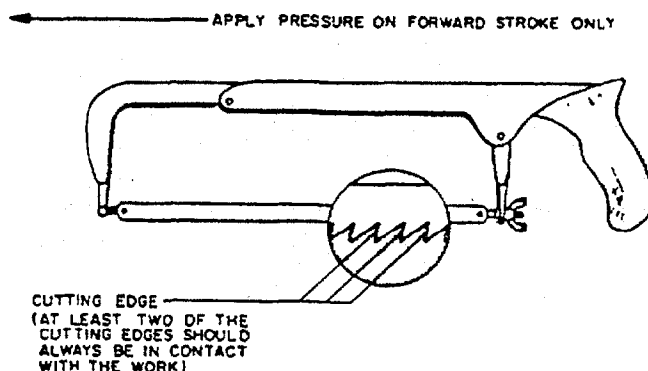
PROPERLY MOUNTED HACKSAW BLADE
